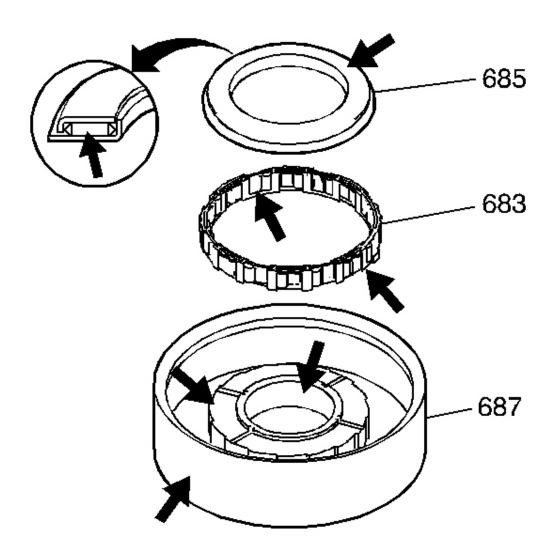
Locating Inspection Areas On 1-2 Support Roller Clutch Components Courtesy of GENERAL MOTORS CORP.
